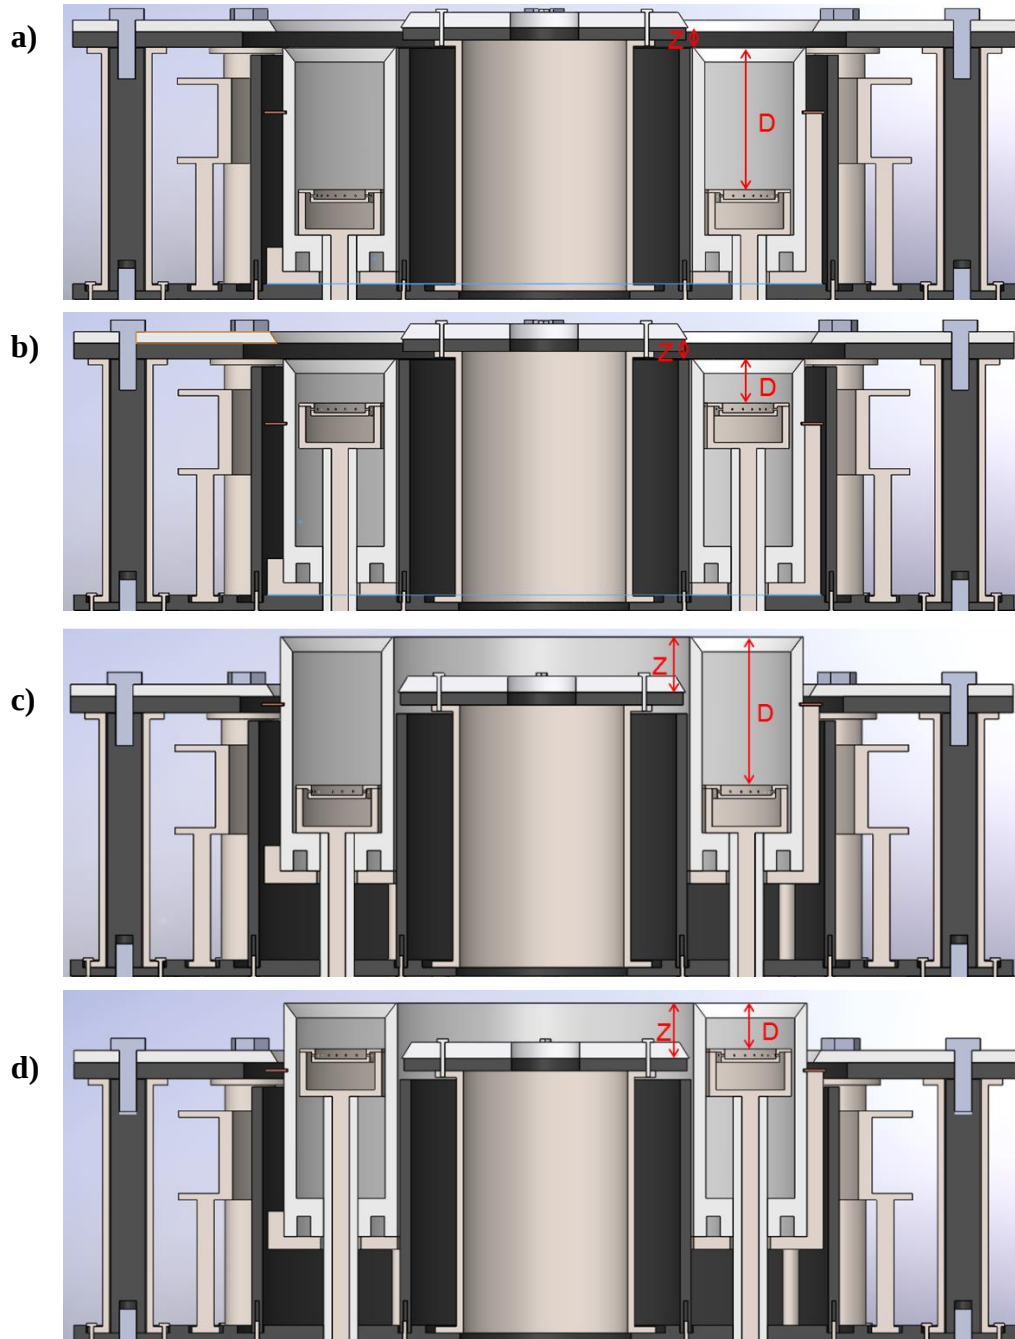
CAD model showing cross sectional view of the possible anode and discharge chamber locations
